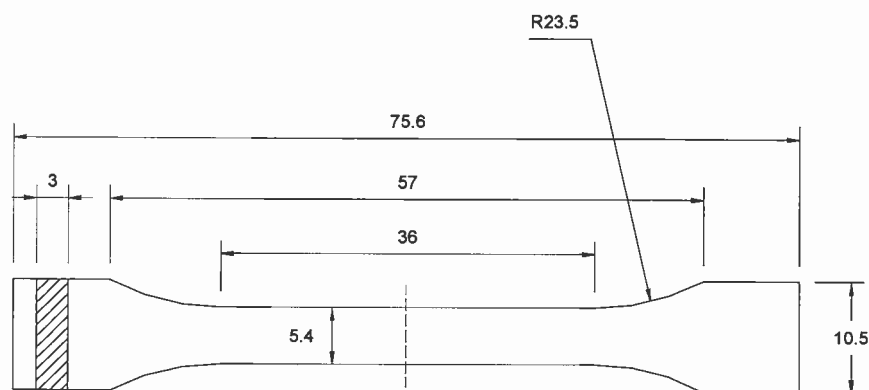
Shape and dimensions of the test specimen (dimensions in millimeters).
